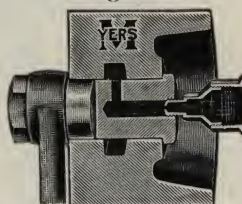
, a cross section of Belt Tightener Pulley showing the oiling system. Note the large groove in Pulley, constantly filled with hard oil, insuring perfect lubrication. Used on all belt tighteners.
